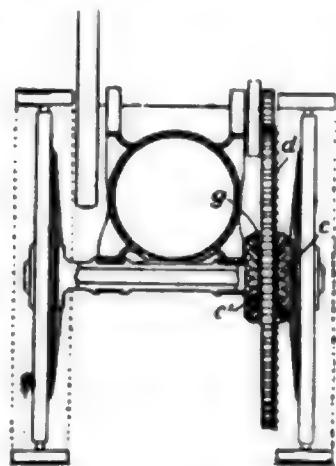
MESSRS. FOWLER AND BURTON'S PLAN.
